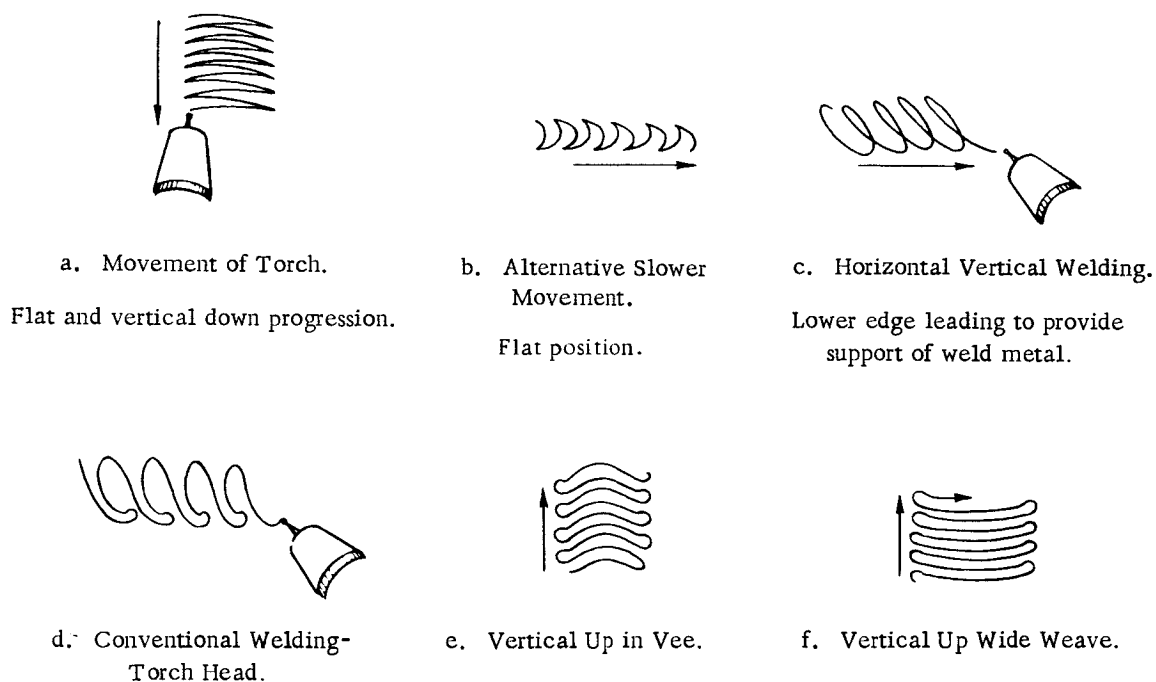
WELDING-TORCH MANIPULATING TECHNIQUES (REF. 45)
